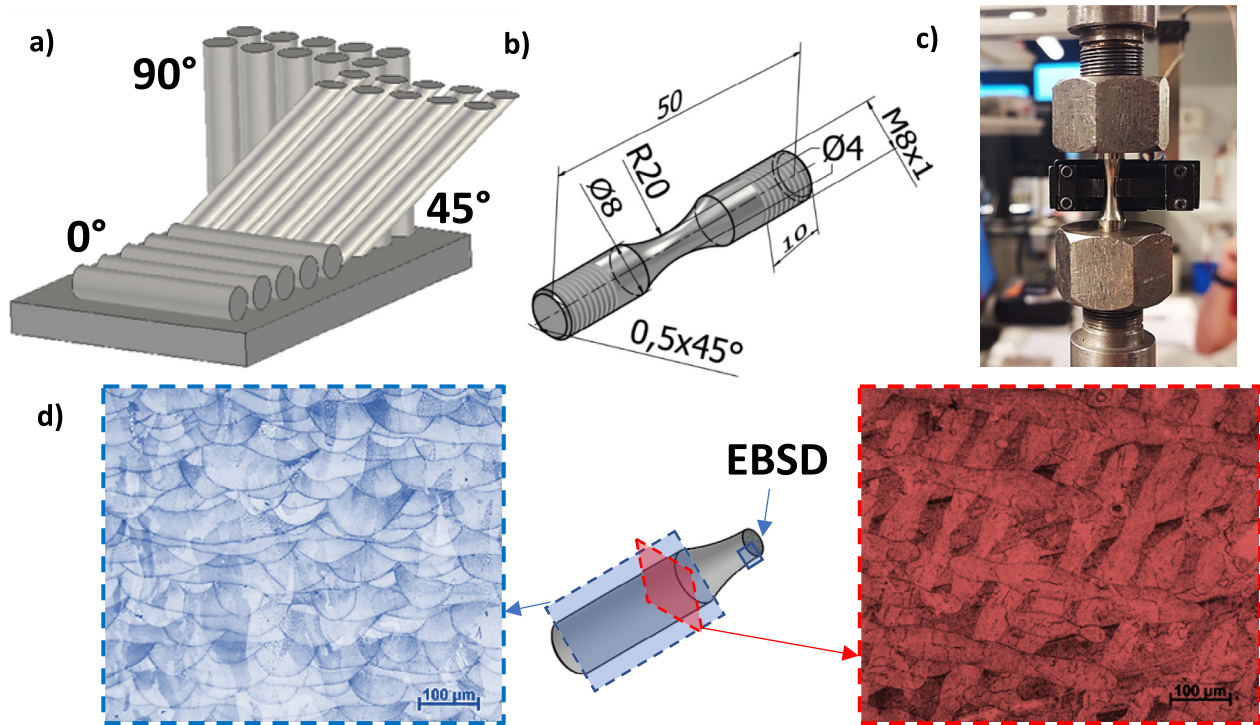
Printing orientations of the Haynes 282 bars (a); engineering drawing of the hourglass specimen (b); general view of the assembled specimen during fatigue testing (c); schematic drawing of fractured specimen after fatigue testing with exposed view of EBSD region of interest and two cross-sections in which microstructure of the as-built alloy was shown in parallel and perpendicular to the building direction section.
